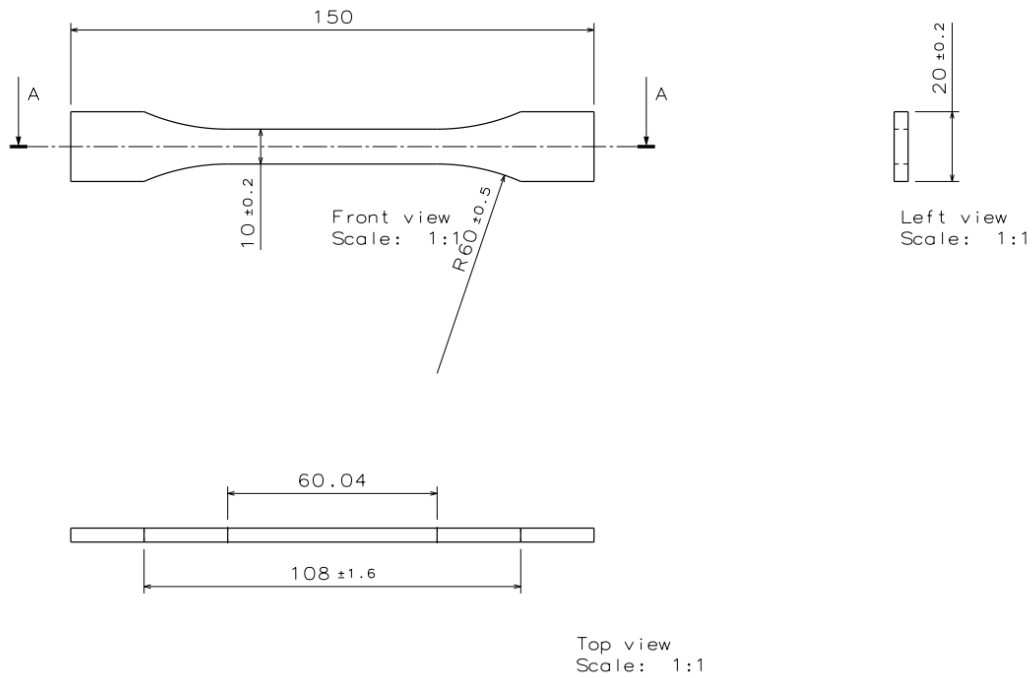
ISO 527-2 Type 1B tensile test specimen dimensions (mm)(British Standard Institution, 2012)
